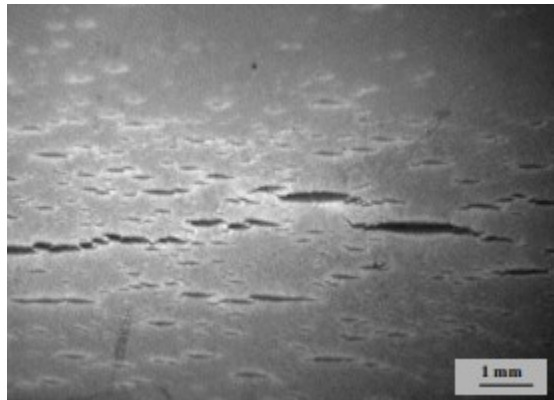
Brittle failure of HDPE pipe (stage III) [82]
